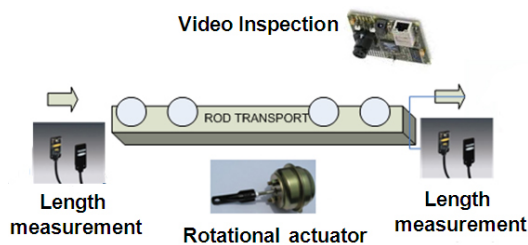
Rod quality inspection and length measurement prior to actual cutting.
